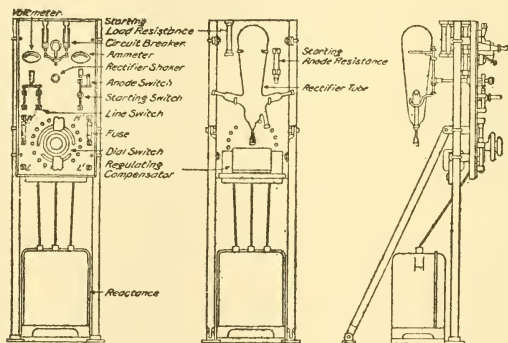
Mercury arc rectifier outfit, or charging set. The cut shows front, rear, and side views of the rectifier, illustrating the arrangement on a panel, of the rectifier tube with its connection and operating devices.
